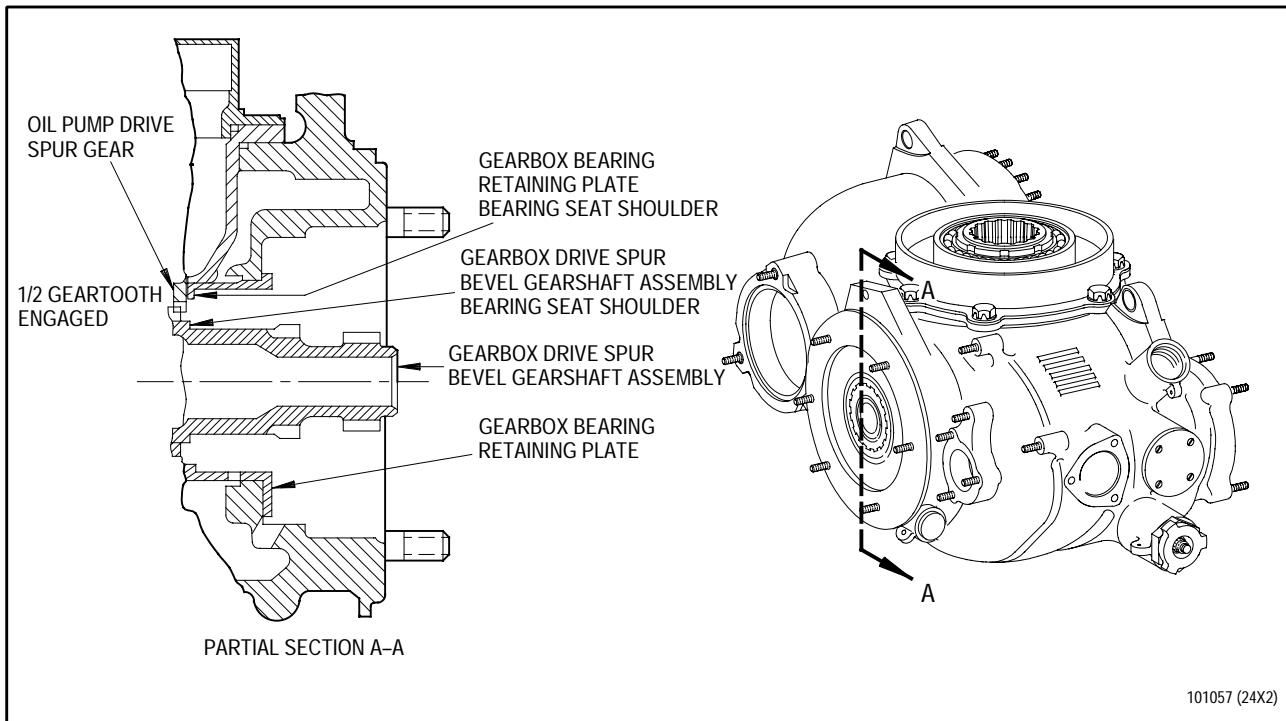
Gearbox Spur Bevel Gearshaft Assembly and Oil Pump Drive Spur Gear
